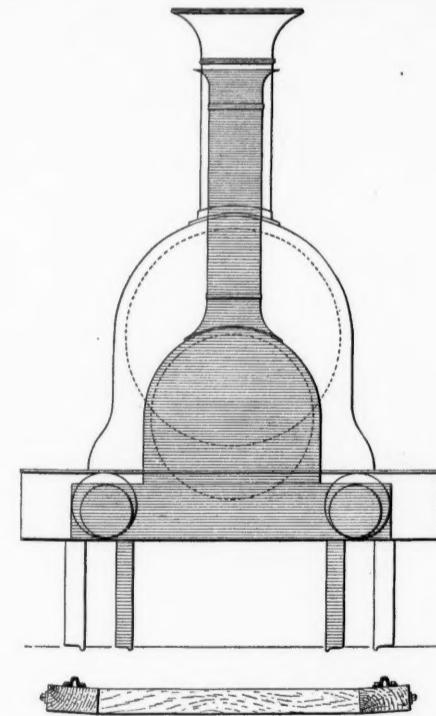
Outlines of Broad Gage and Narrow Gage Engines, England, 1846 (84 in. and 56½ in.).
